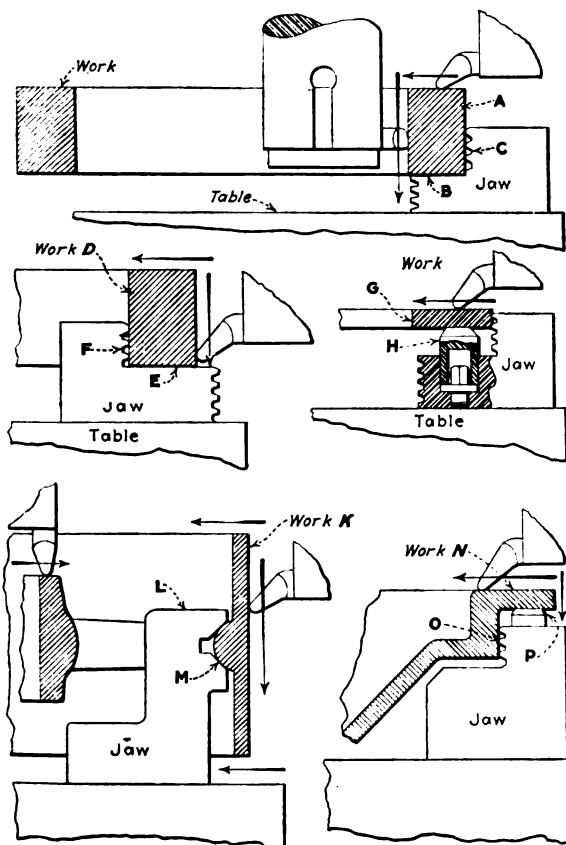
METHODS OF HOLDING WORK IN CHUCK JAWS
